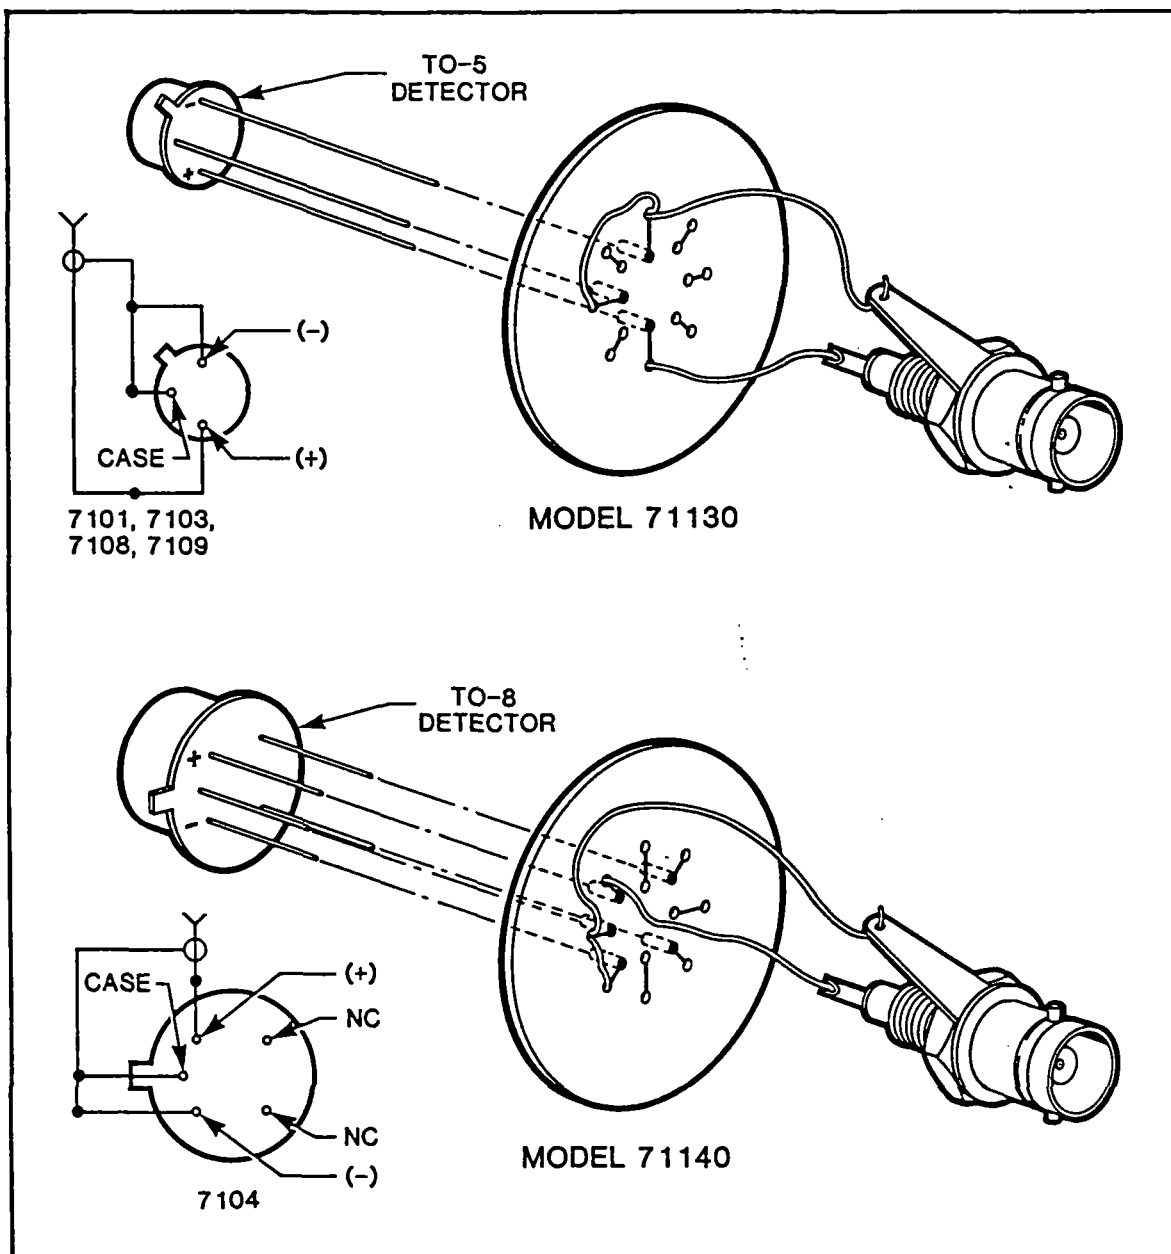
DETECTOR/HEAD PIN-SOCKET MATING
